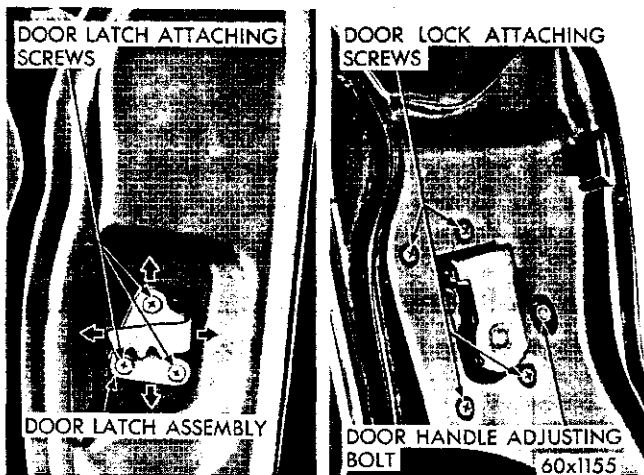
Door Lock Rotor and Striker Plate Assembly
